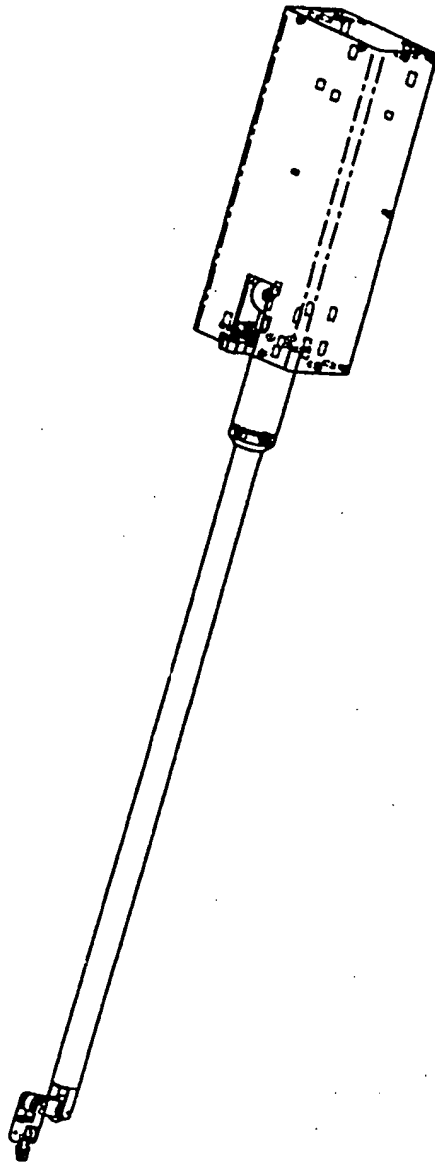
The wrist unit is a detachable assembly which clamps to the carriage. The cables directly align with the cables on the main unit and clamp to those cables for attachment.
